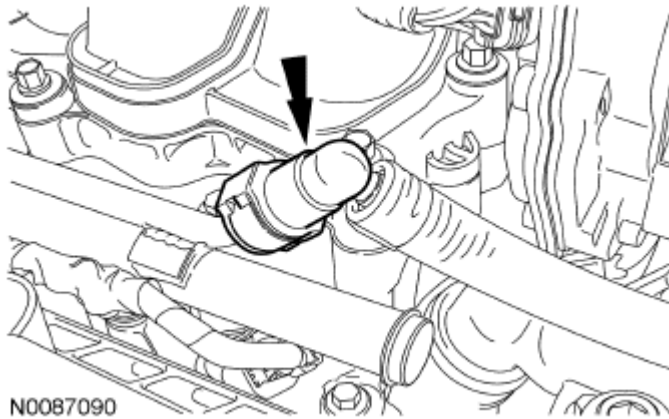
Locating Fuel Supply Tube Quick Connect Coupling
